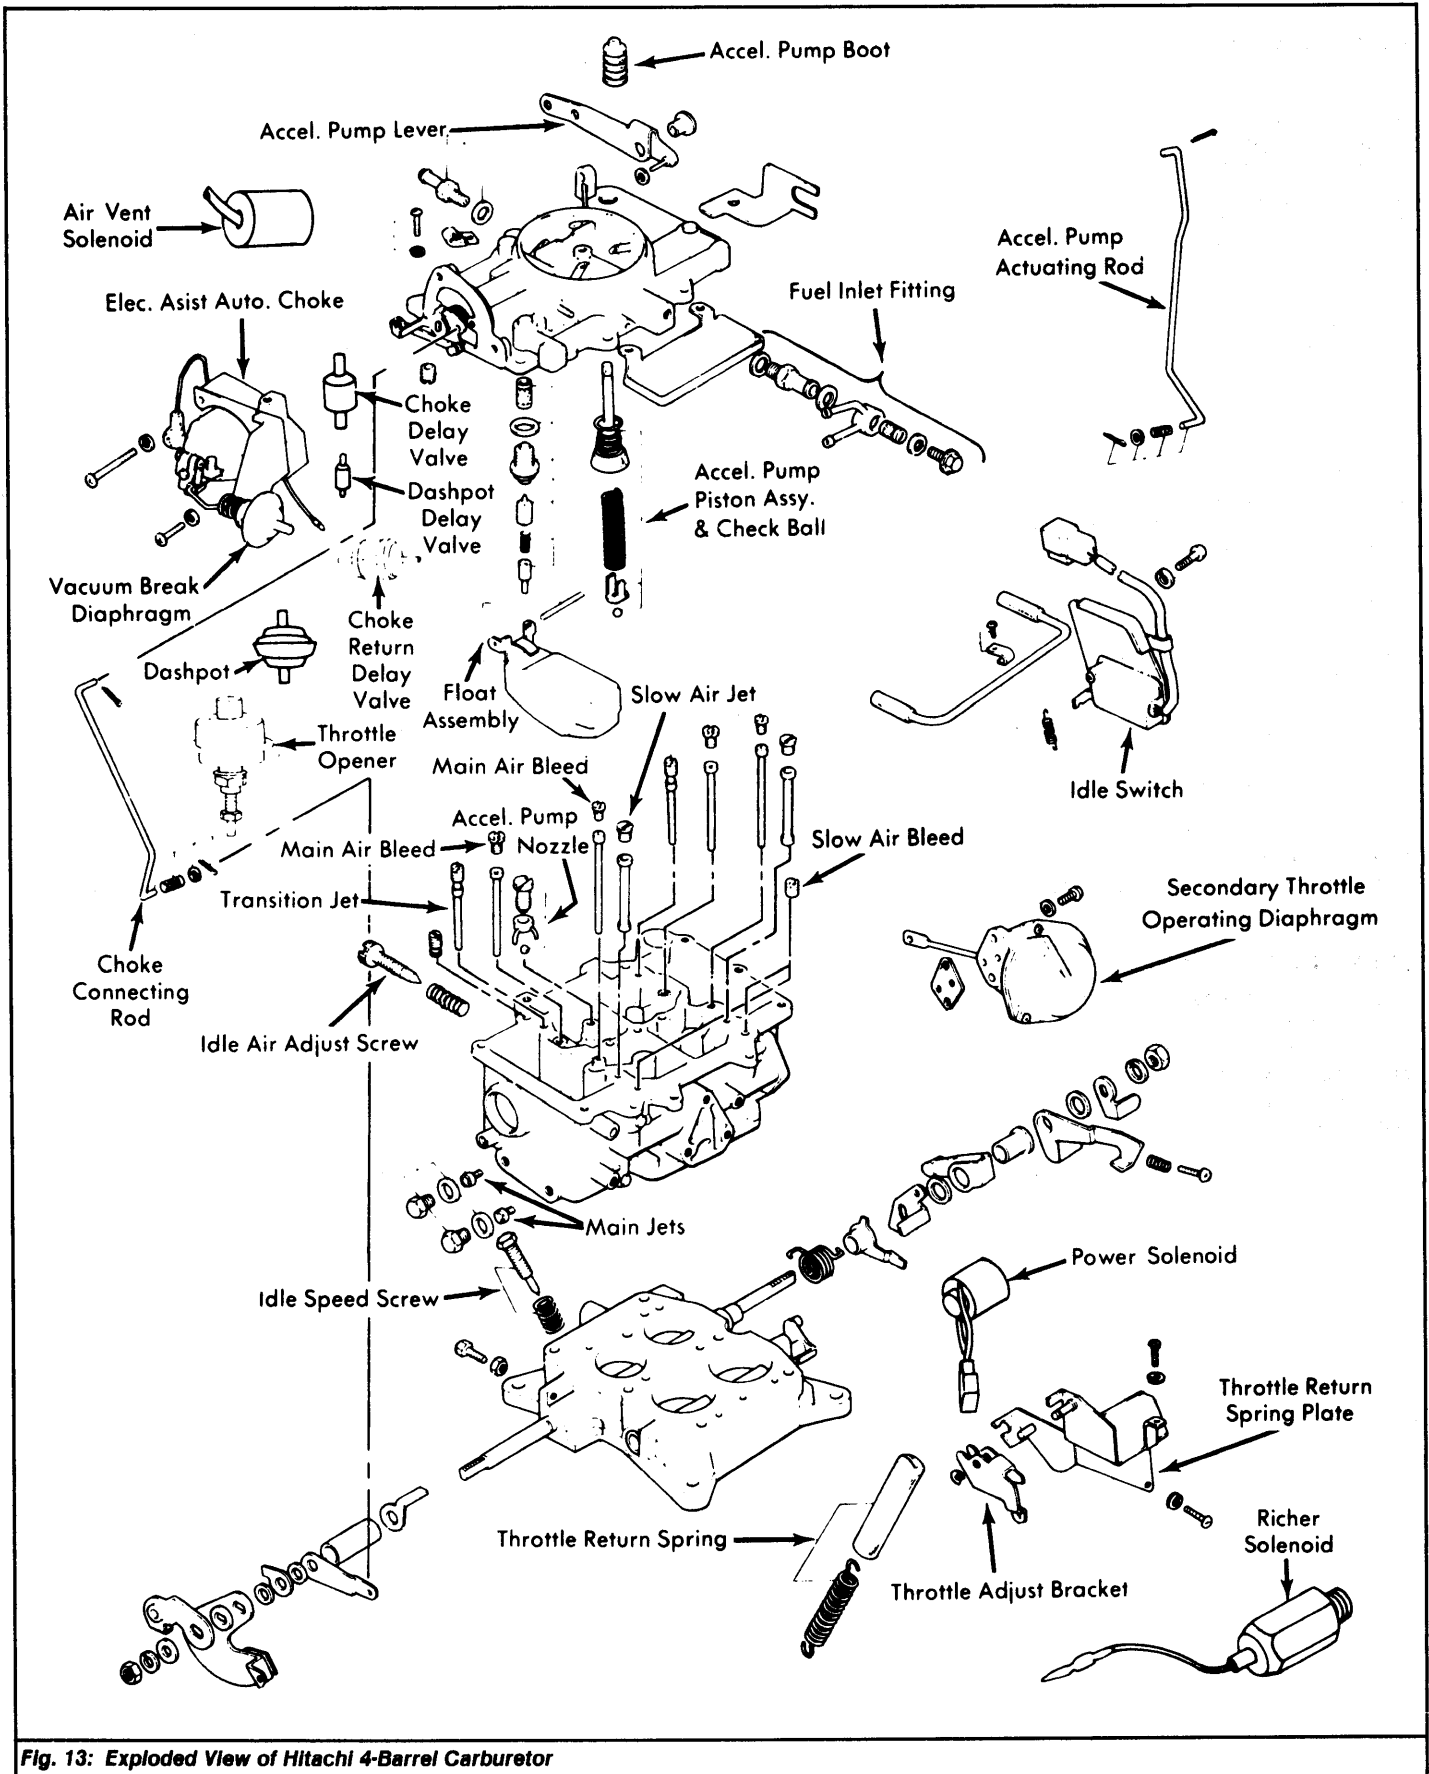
Exploded View of Hitachi 4-Barrel Carburetor
